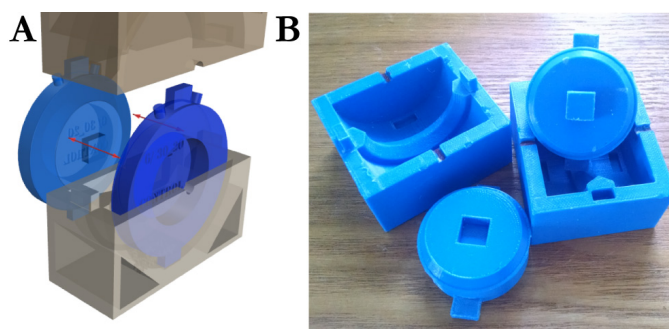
(A) CAD model, with indicated assembly for 4-part molds. (B) 3D printed negative molds used for fabricating RCF with a room temperature resin-cure molding of poly(vinyl siloxane) elastomer.
